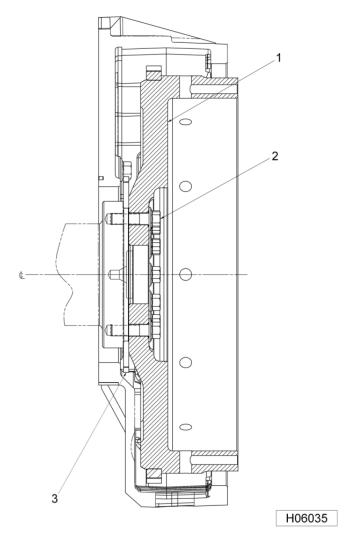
Pot type flywheel - for multiple plate clutch applications (800 lbf·ft and above)
